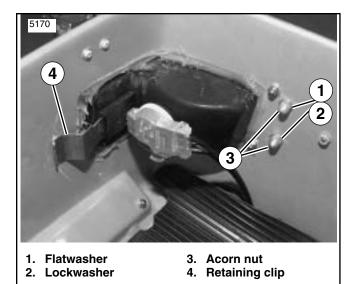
Mounting Corner Trim Assembly (View Inside of Tour-Pak)
